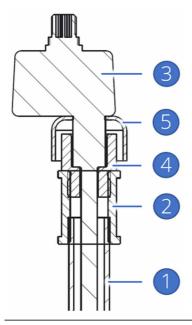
electronical oil dipstick – installation angle 25,6° to 26,9°
